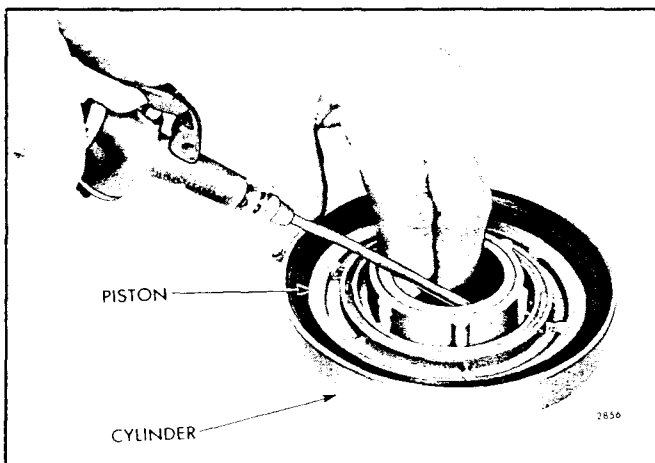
Removing Forward Clutch Piston from Forward Clutch Piston Cylinder
